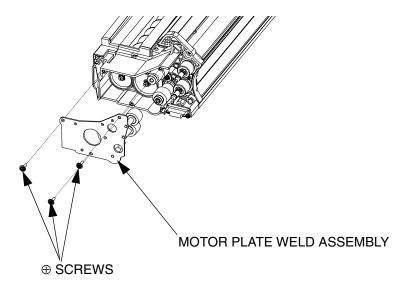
Removal of the Idler Gear (Z17/22) Assembly
